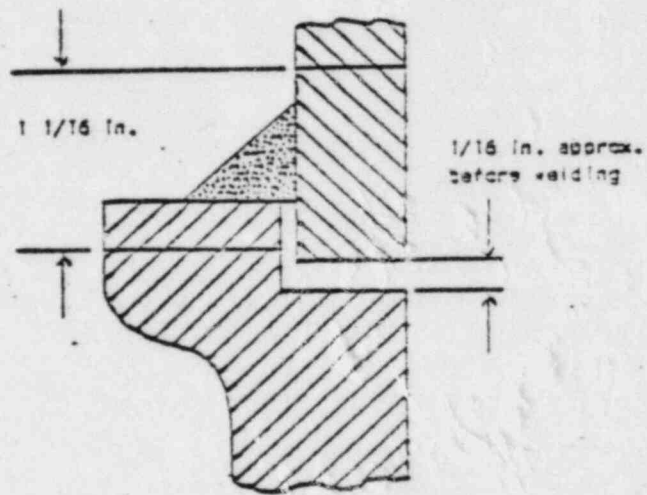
A(a) DIMENSIONS FOR FITUP OF SOCKET JOINTS
